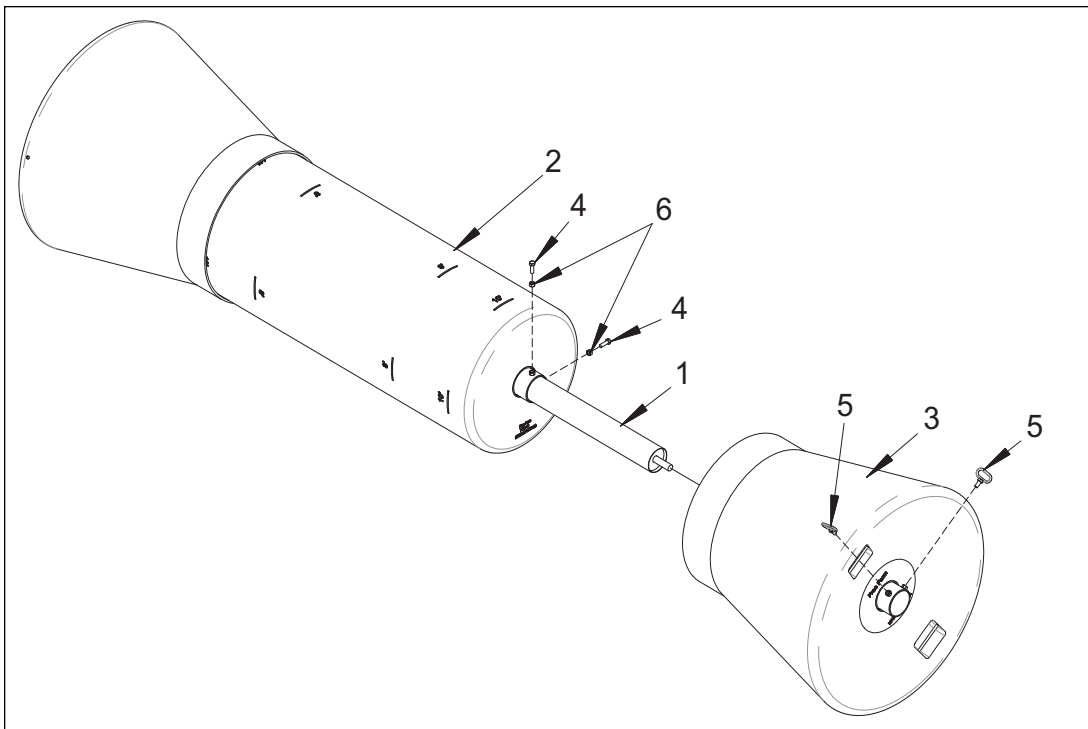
Roller Assembly ROLLER_ASSY.CAD
